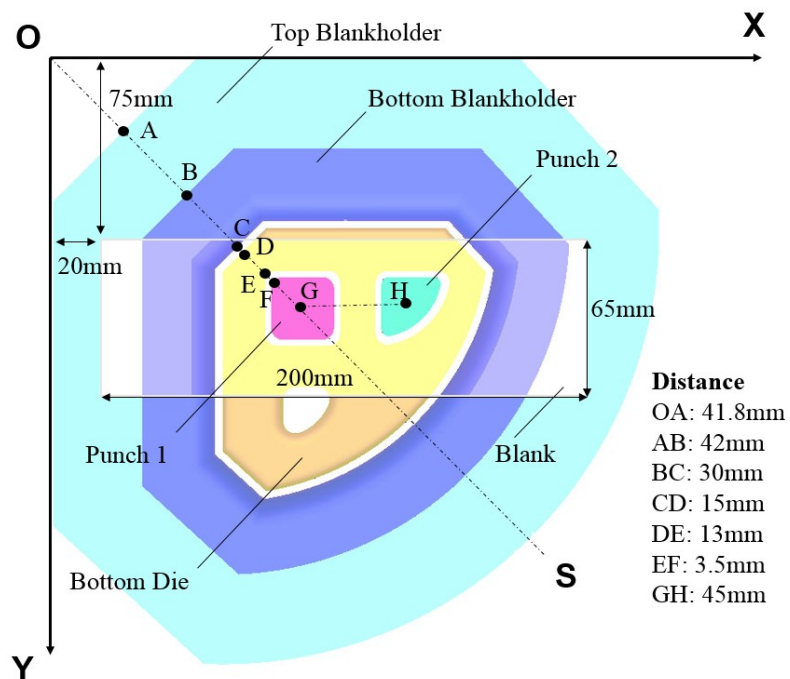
Positions of bottom blankholder, bottom die, punch, blank and top blankholder
